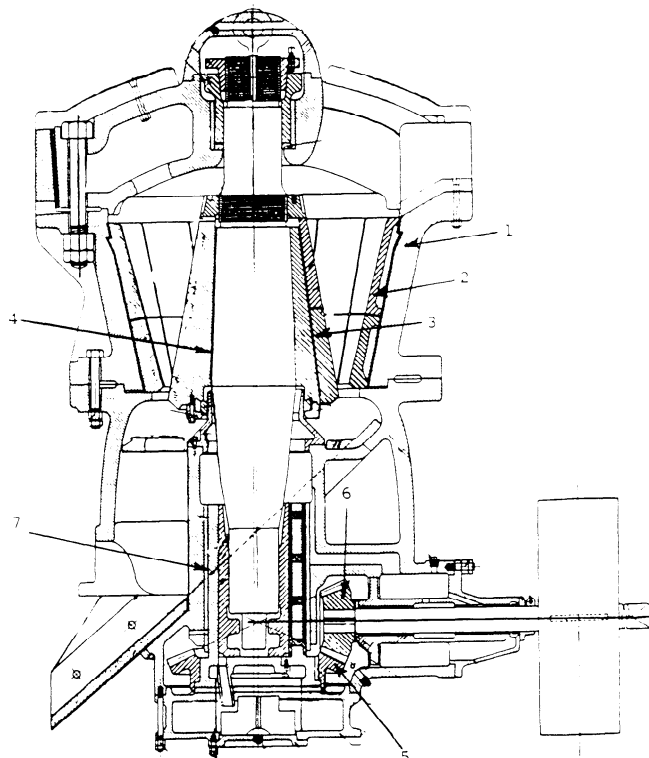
Sectional view of short-shaft suspended gyrotory crusher (courtesy: Fuller Co.).
